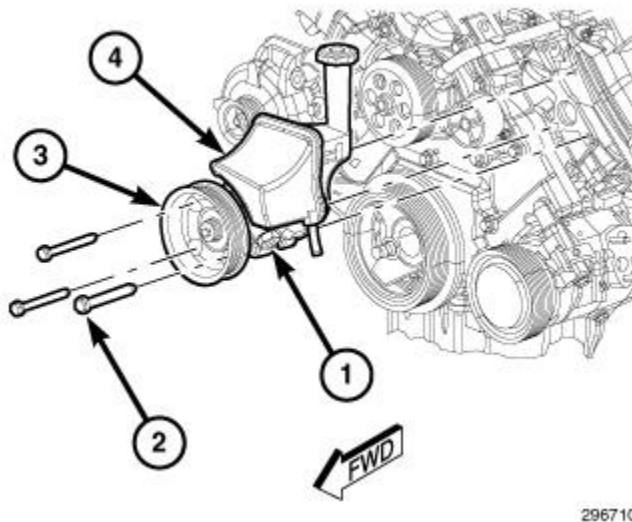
Power Steering Reservoir, Pump, Pulley & Bolts
